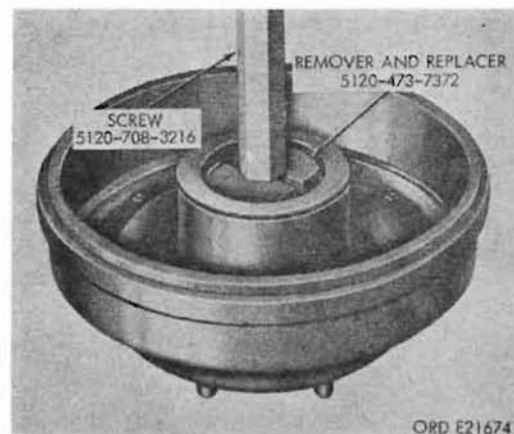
Inner bearing cup installation using remover and replacer 5120-473-7372 and screw 5120-708-3216
